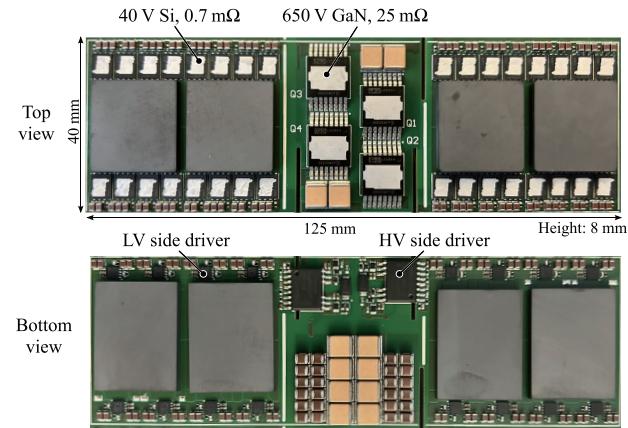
Top and bottom view of the 6 kW 800 V to 12 V converter and placement of components.
